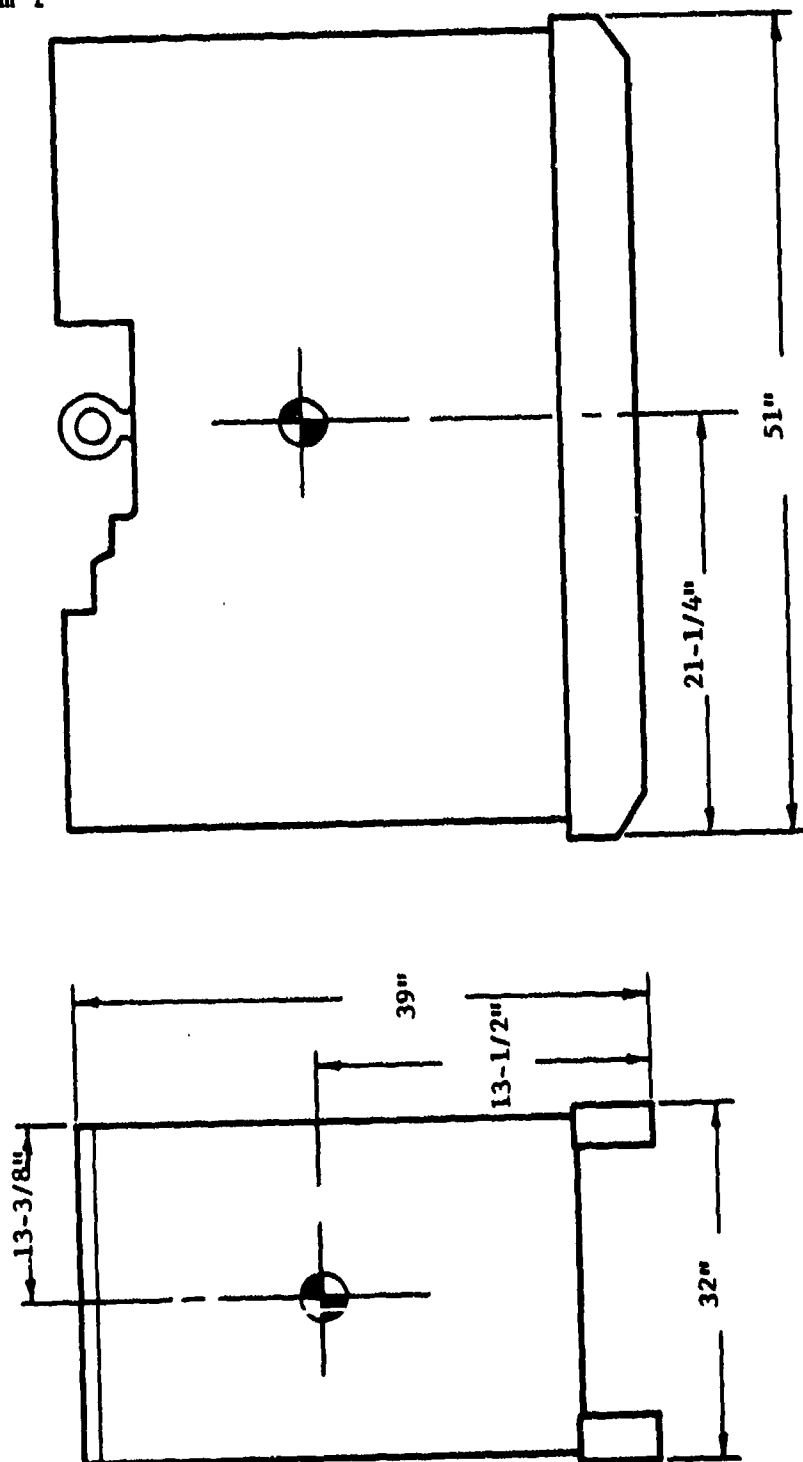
OUTLINE DRAWING SHOWING DIMENSIONS
